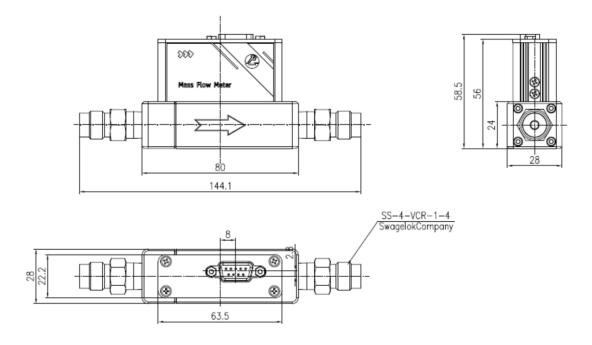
MFS3000 dimensions with VCR 1/4" connectors. (>20SLPM)
